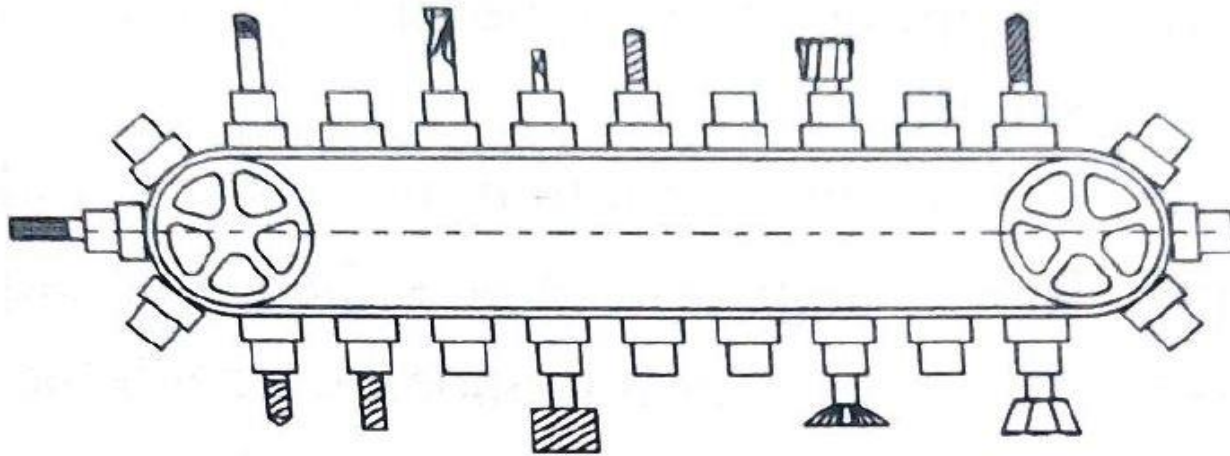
Chain-type tool magazine for holding larger number of spindle tooling used in CNC machining centres
